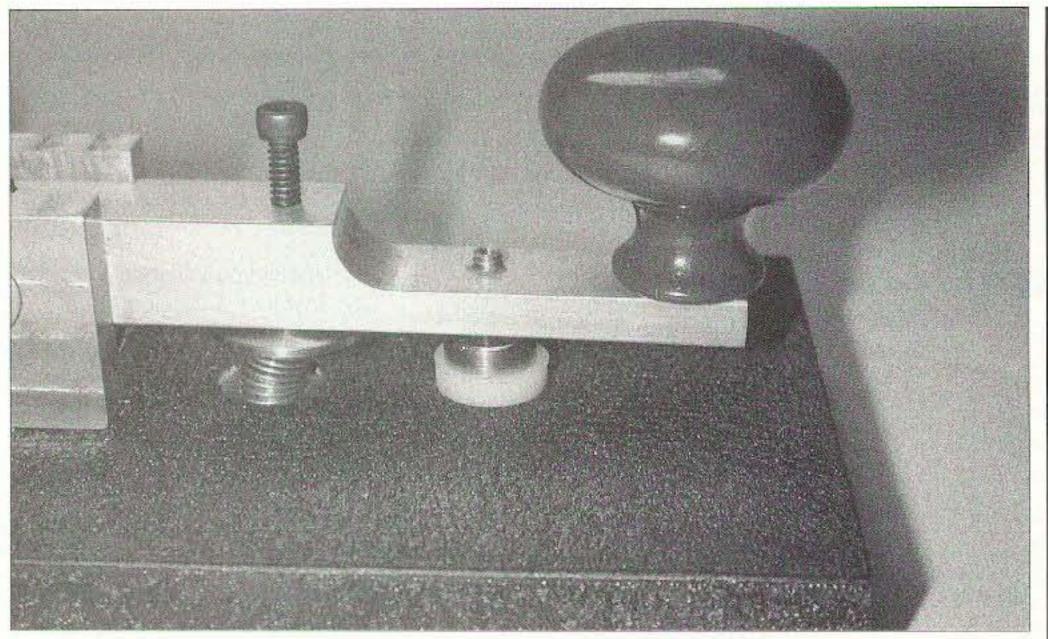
Photo I. The knob is a drawer pull. The upper contact is a cone-pointed set screw.
